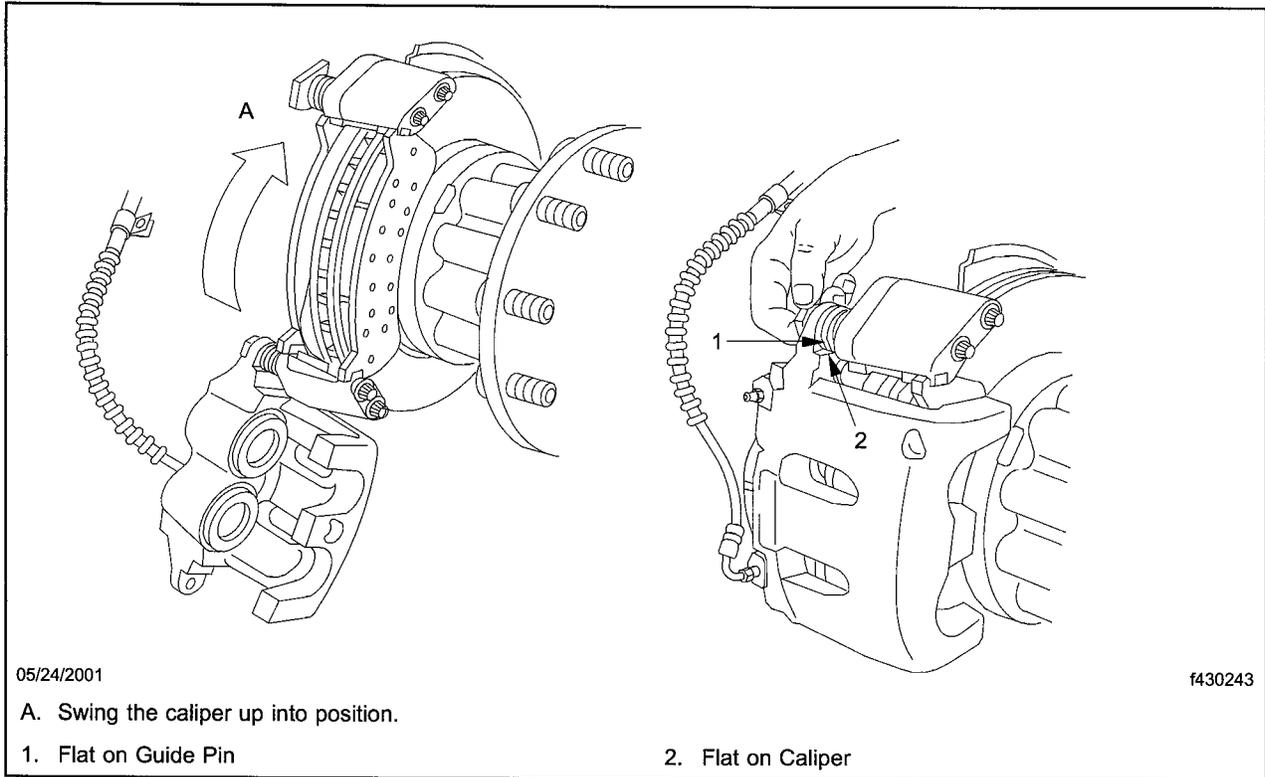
, Closing the Caliper Over the Brake Pads and Rotor
